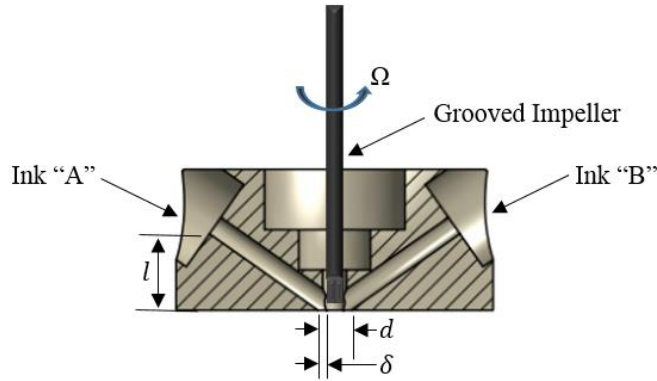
Mixing chamber cross-sectional view with impeller inserted [25]
